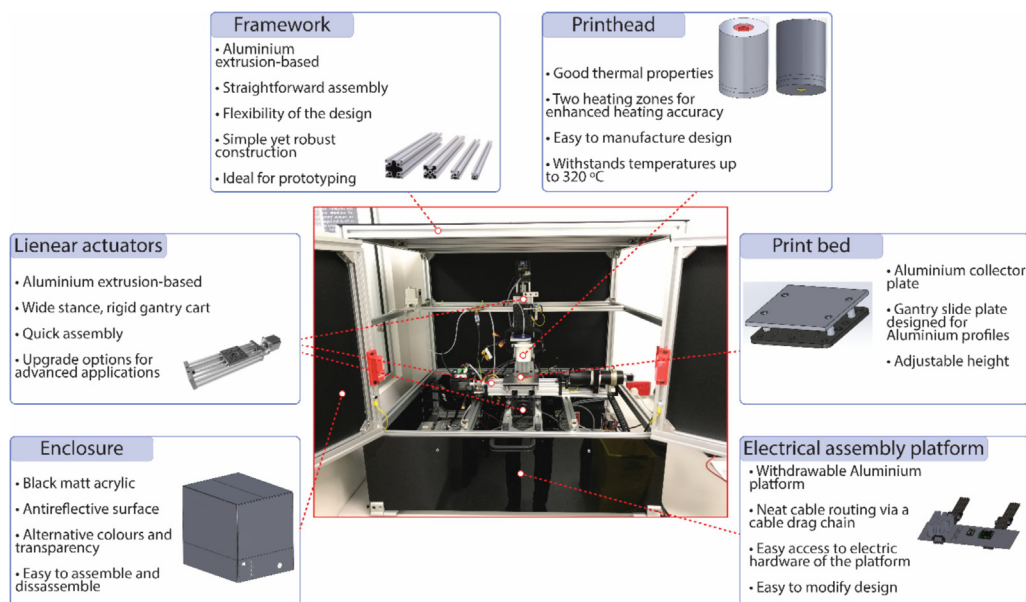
Mechanical design overview of an Automated MEW platform. The platform consists of 3-axis linear actuator, aluminium extrusion-based framework, teflon printhead, aluminium print bed and withdrawable electrical assembly platform.
